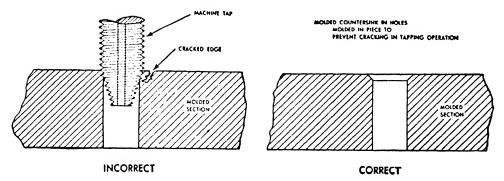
For machine tapping, provide a slight countersink in the molded piece for holes less than 3/16 in, diameter.
